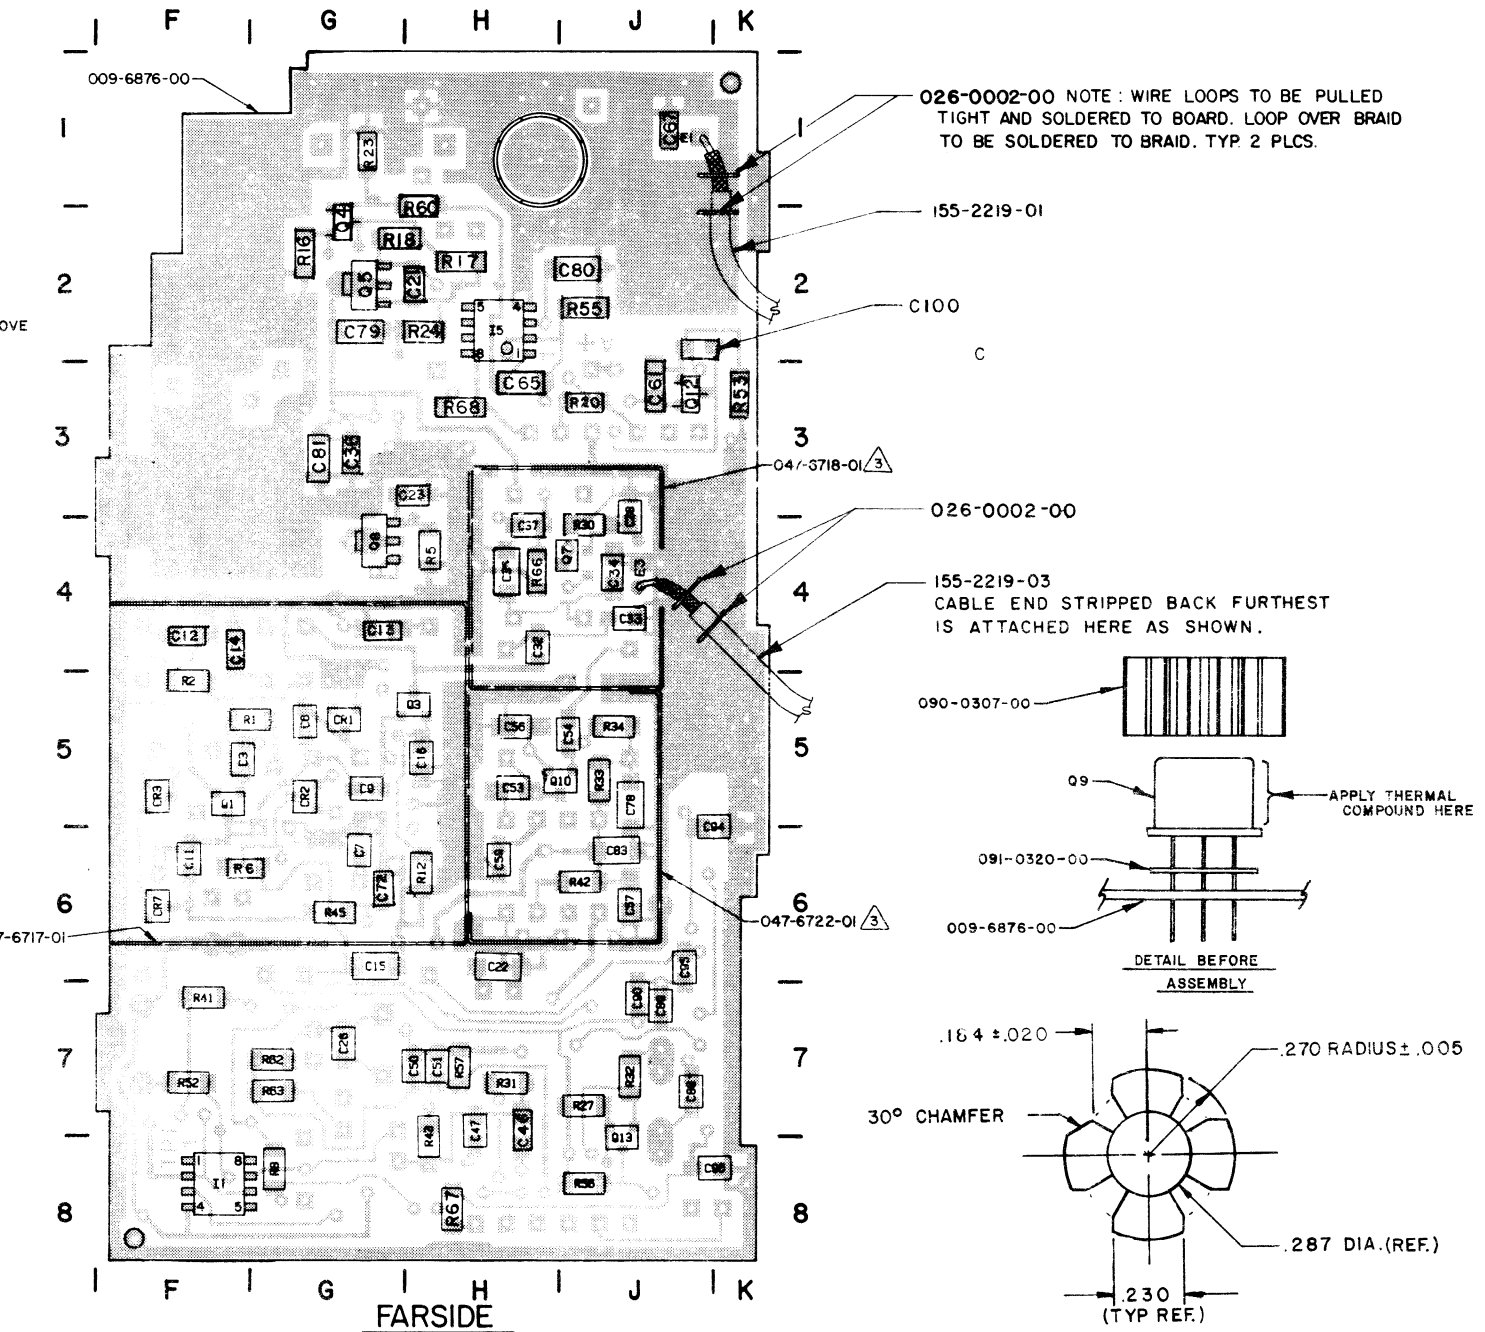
5 WATT TRANSMITTER BOARD ASSEMBLY
